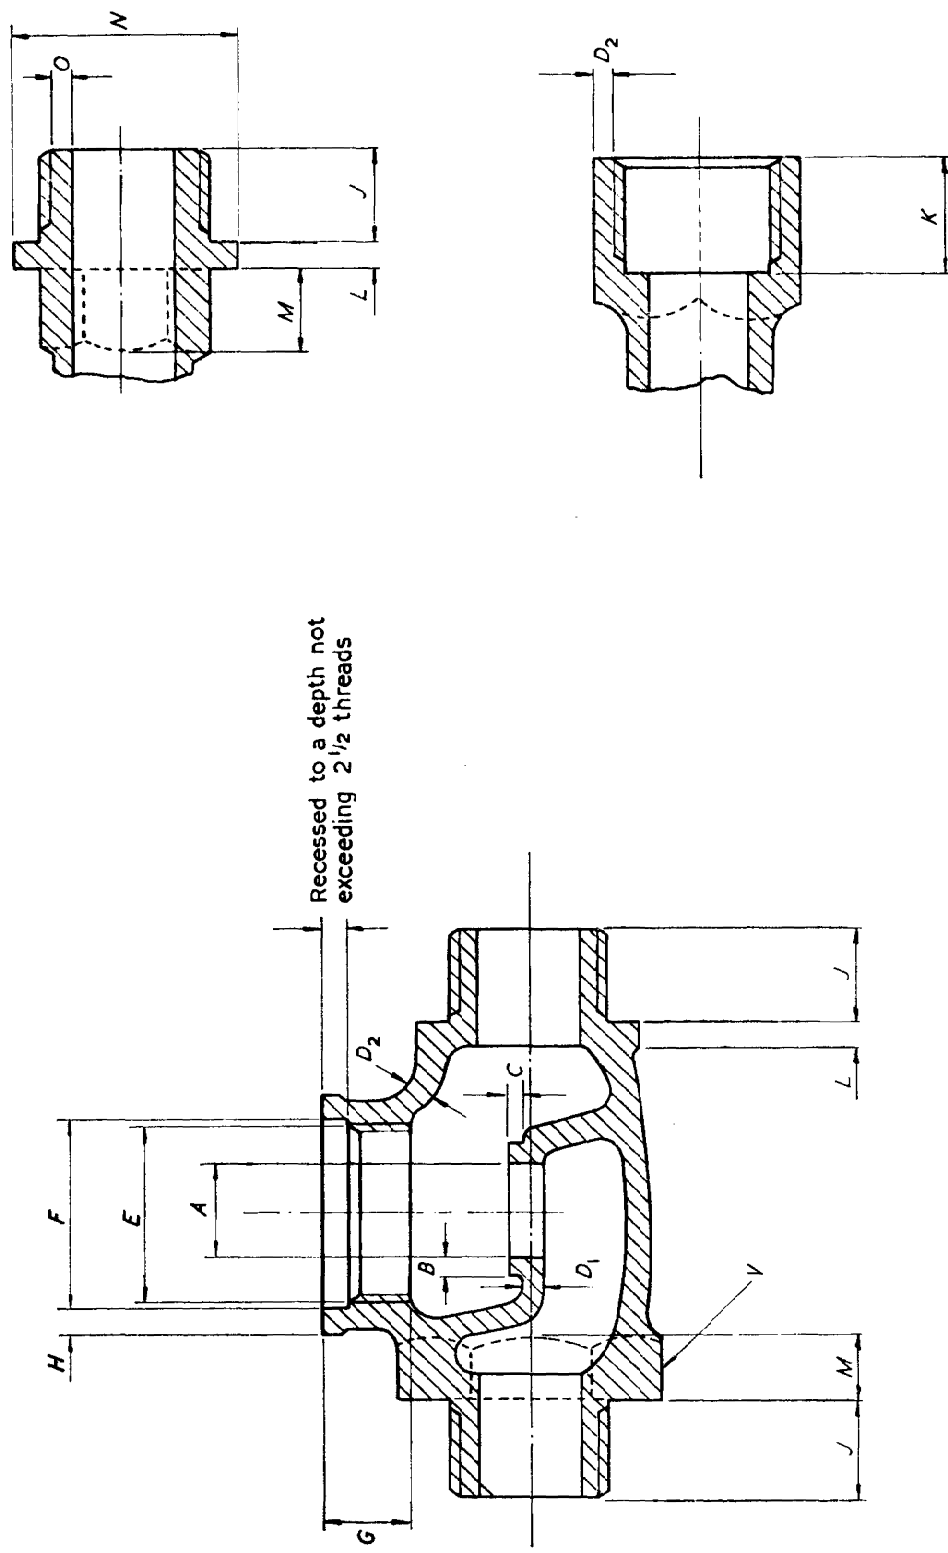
Dimensions of stopvalve bodies (see Tables 1 and 2)
